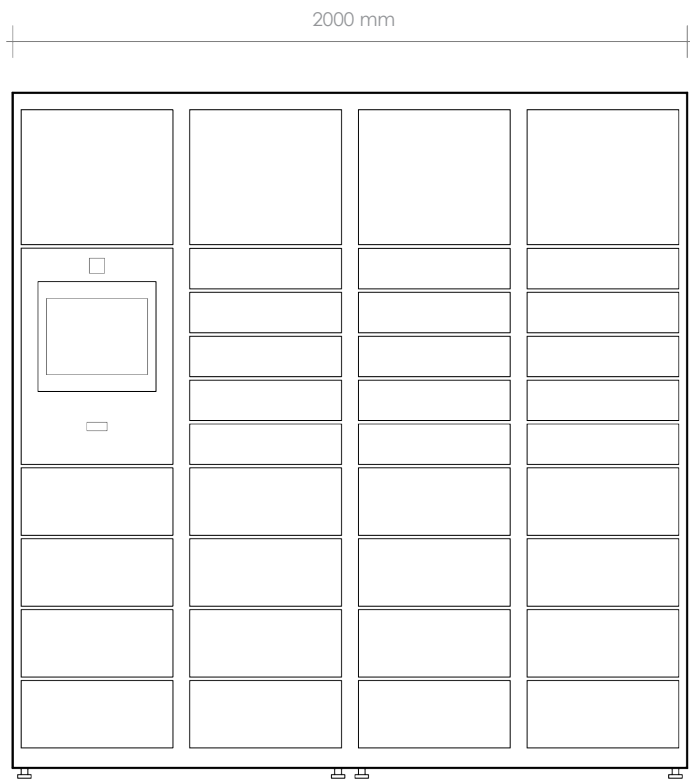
PigeonBox Vancouver self-collection locker drawing
